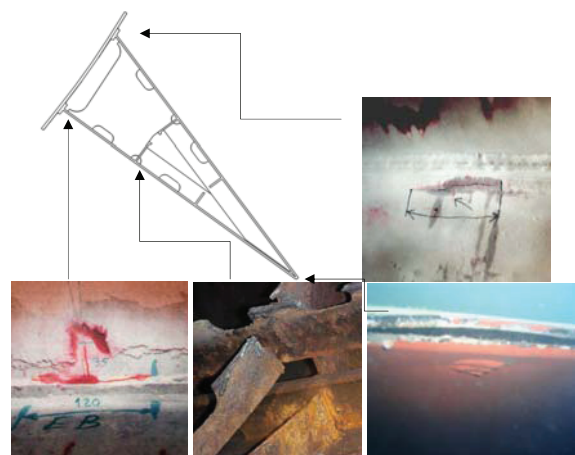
Cross section view of the bilge keel with a "V" arrangement studied. Examples of cracks detected.
